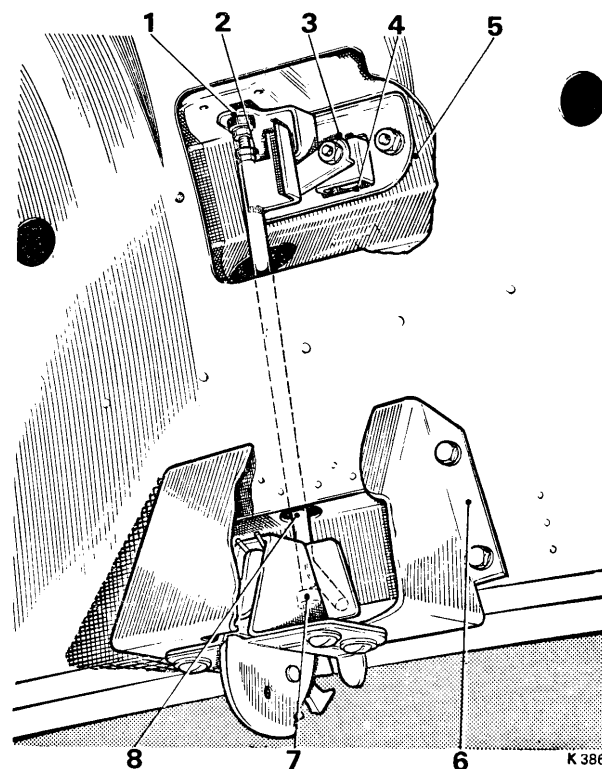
LUGGAGE COMPARTMENT LID LOCK MECHANISM (4-Door Saloon and Long Wheelbase Cars)
